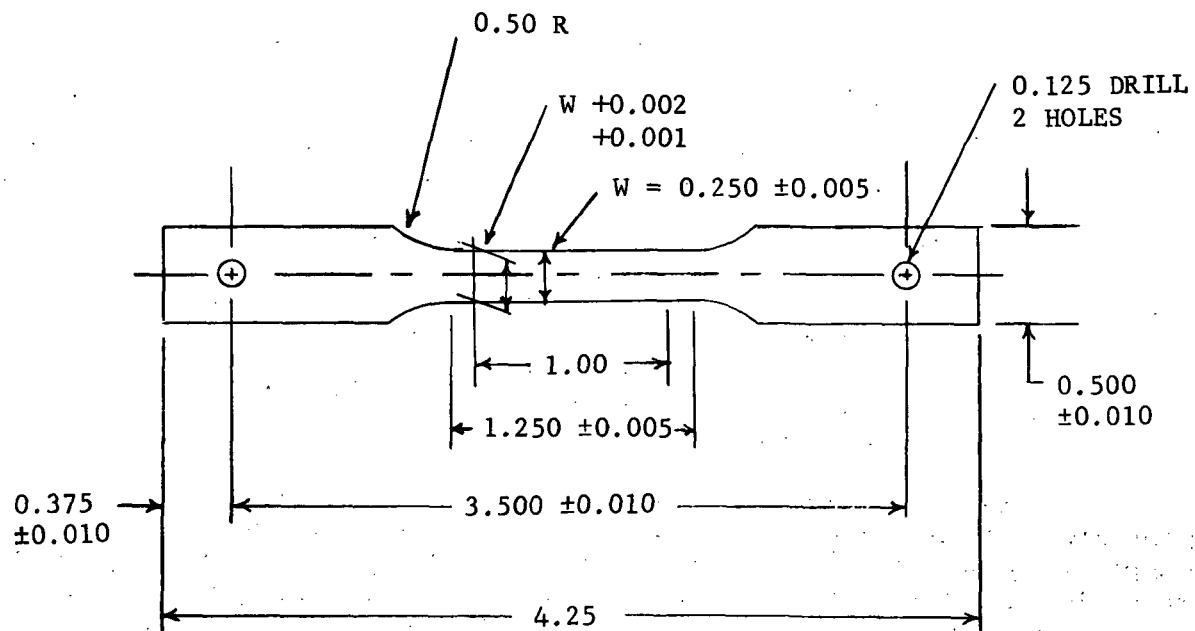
VM-103 SHEET TENSILE SPECIMEN
